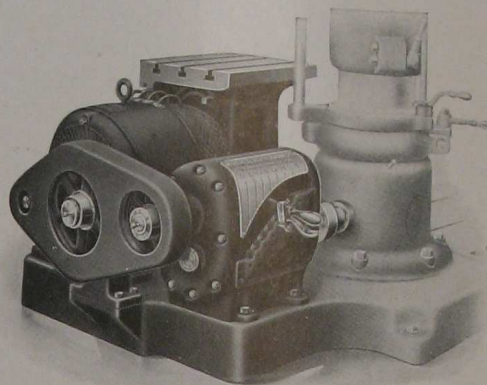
Constant Speed Motor Drive thru Speed Box.
